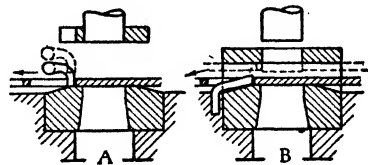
For locating the strip in progressive blanking, the cam-lifted finger gauge (cut A), or the fixed gauge with metal clearance above it under a fixed stripper (cut B).
